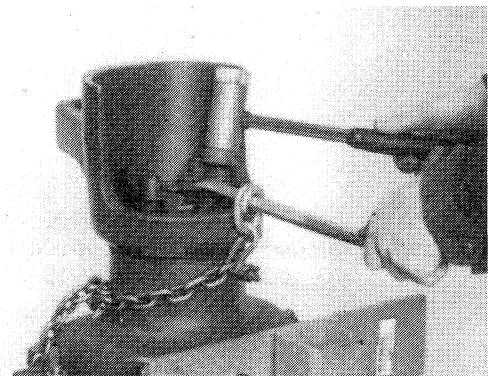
To adjust bevel pinion shaft bearing preload, first apply downward force to shaft and strike end of shaft several times with a soft hammer to seat bearings. Refer to text for adjustment procedure.
